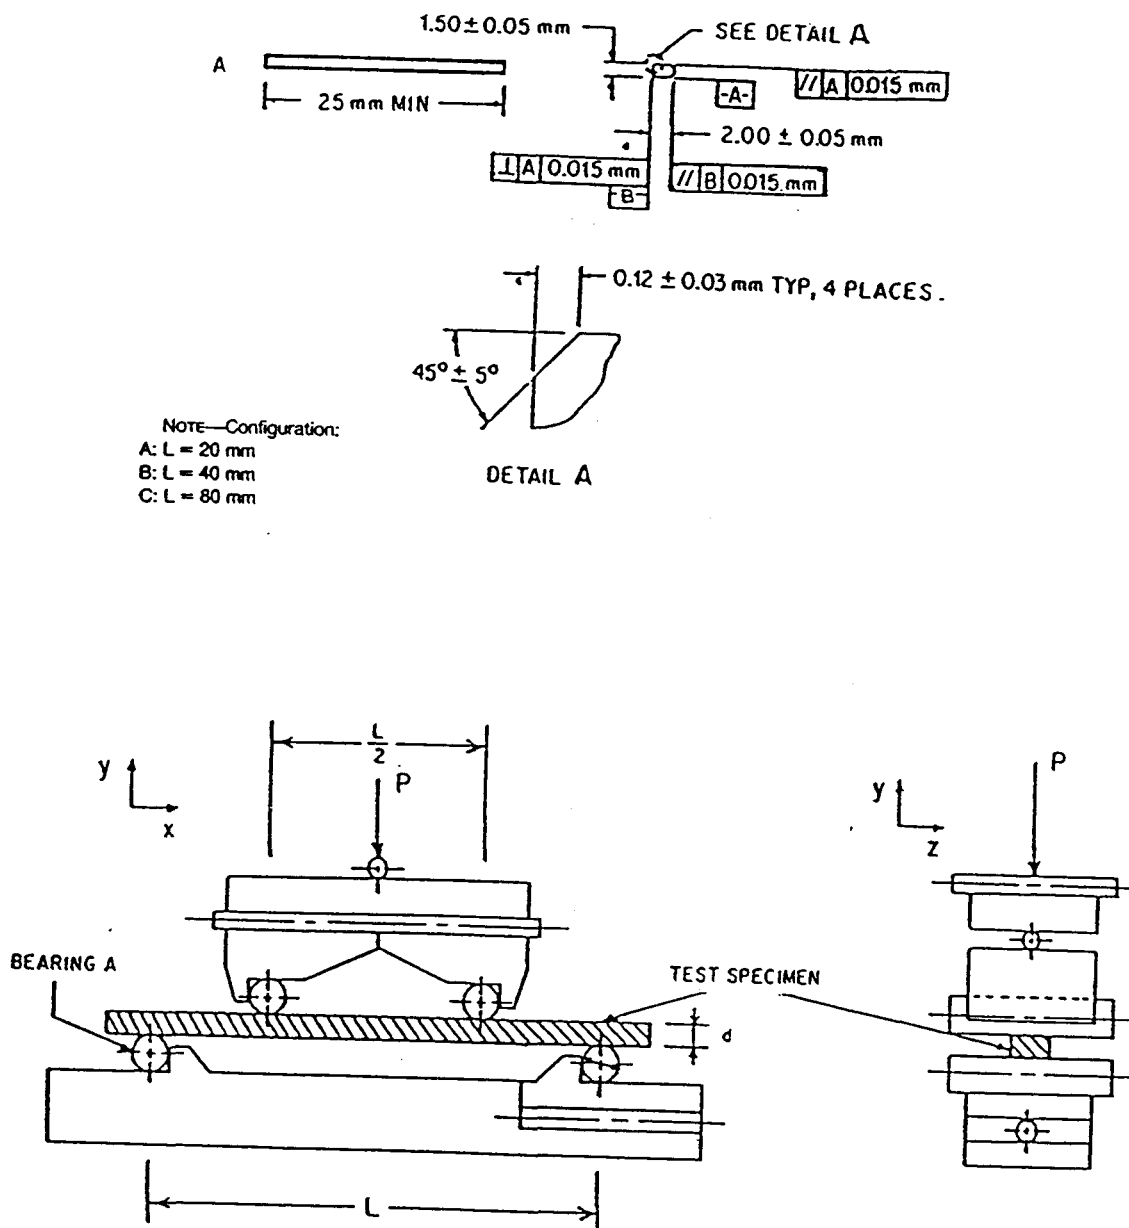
ASTM C1161-90 standard specimen dimensions and rig set-up for a four-point bend test.
